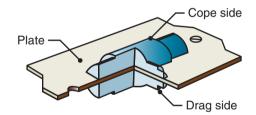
A typical metal match-plate pattern used in sand casting.
